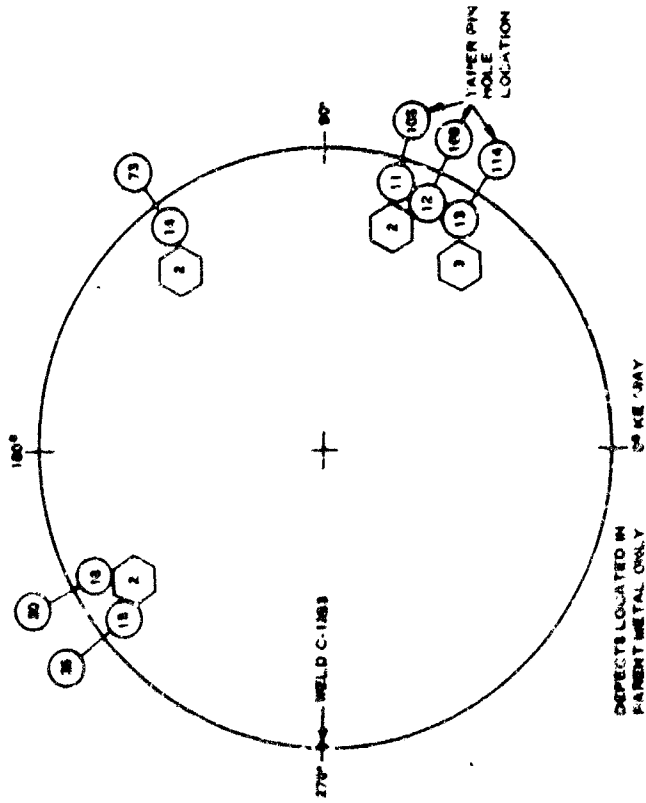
Forward Head Section, Weld C-5, Igniter Boss Weld, View AA
